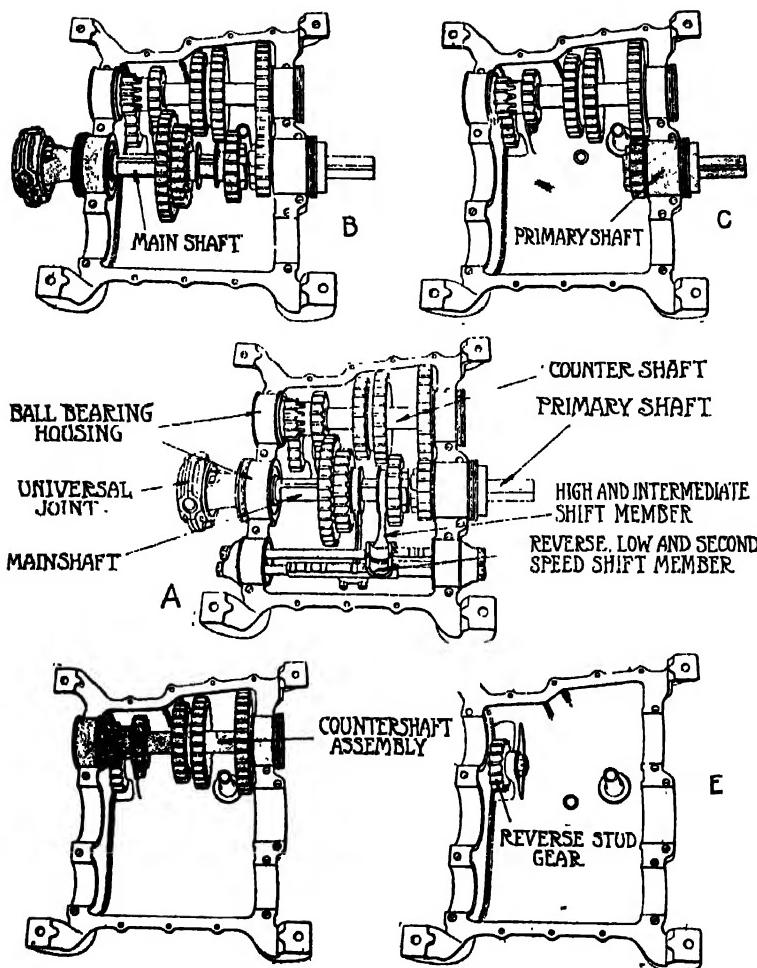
Showing Steps in Dismantling Locomobile Four Speed Transmission.
